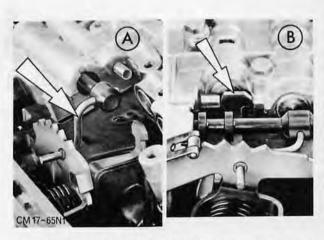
A – Install valve body locating connecting rod into manual selection slide
